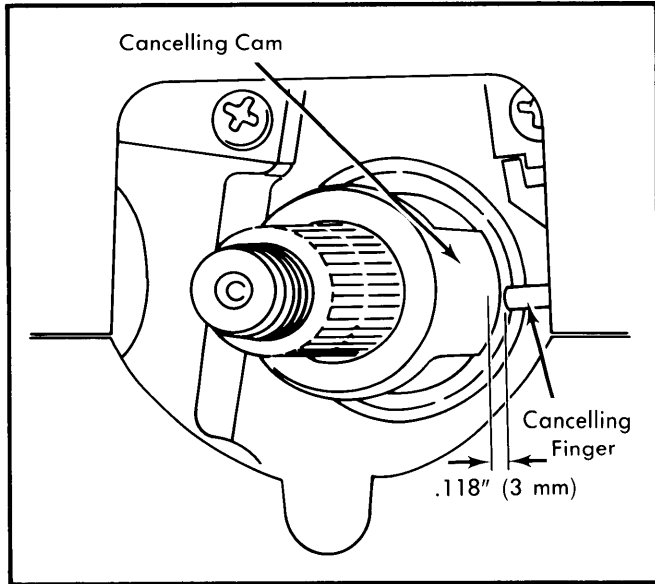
Cancelling Cam and Finger with Clearance Shown
